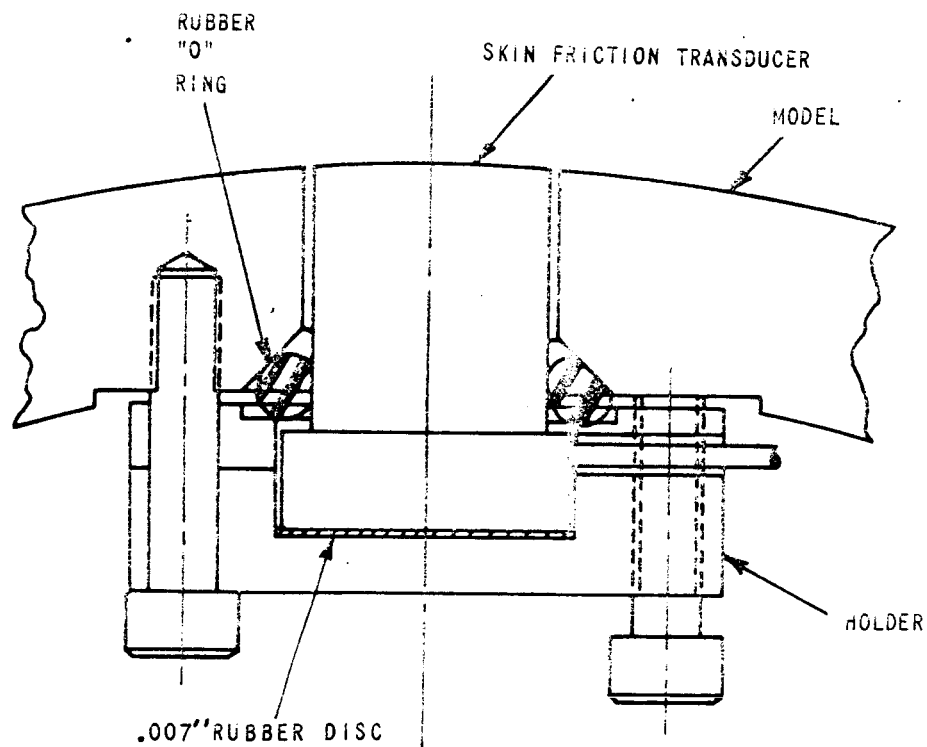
DRAWING OF HOLDER FOR MOUNTING TRANSDUCER IN MODEL
